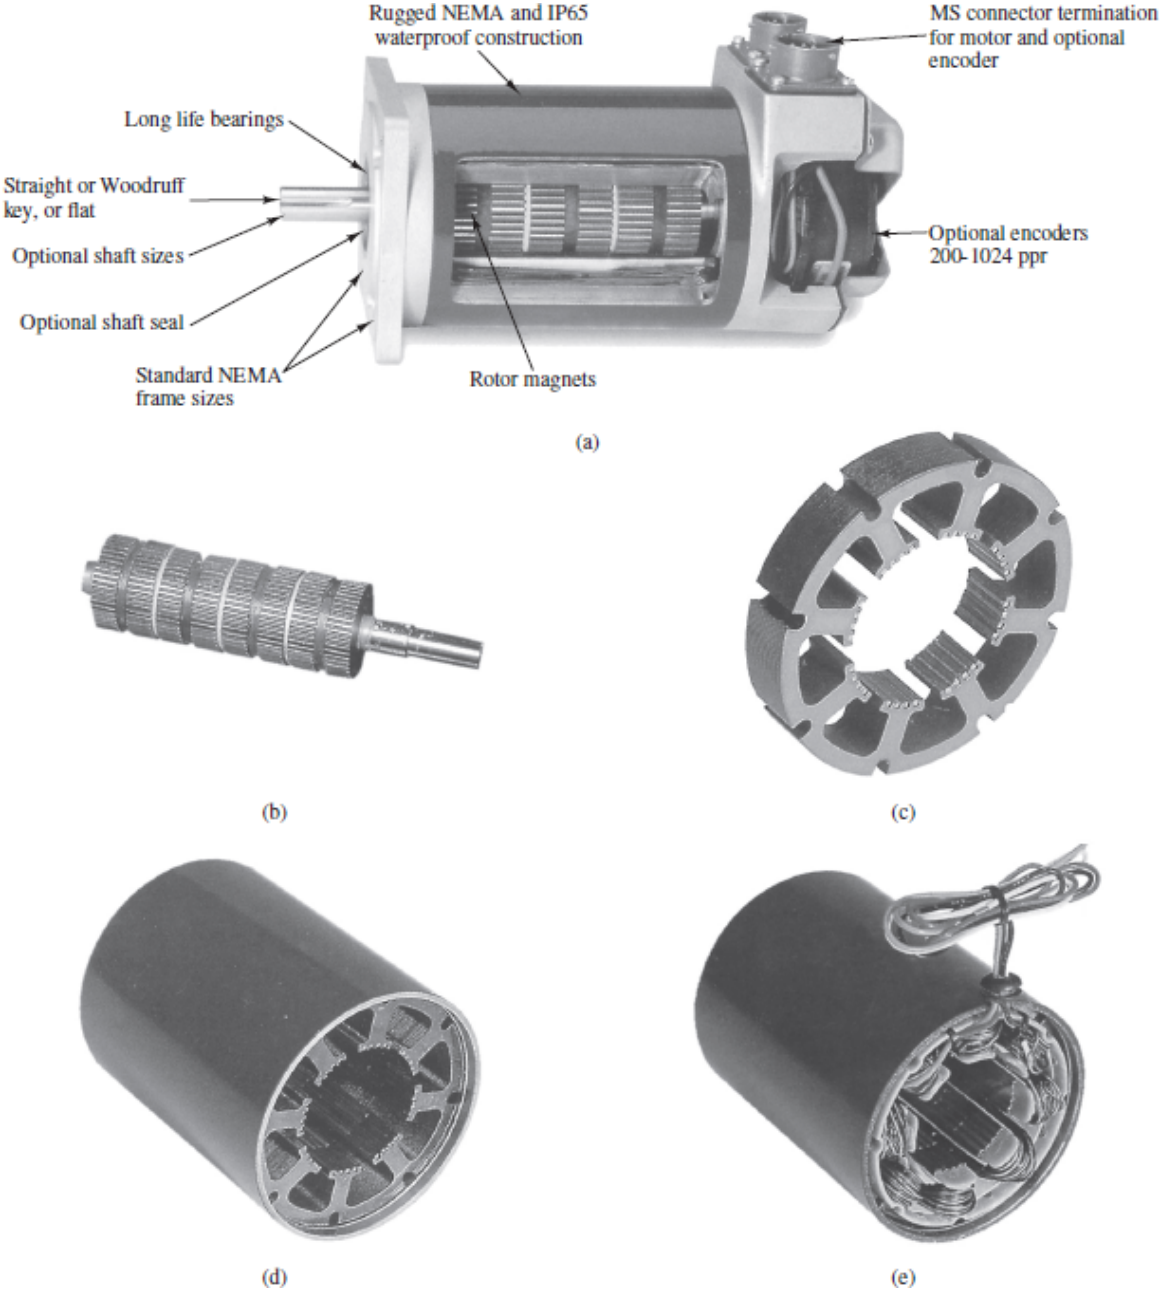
VR stepper motor: (a) complete motor assembly; (b) PM rotor; (c) stator cross section; (d) fully assembled stator; (e) stator
